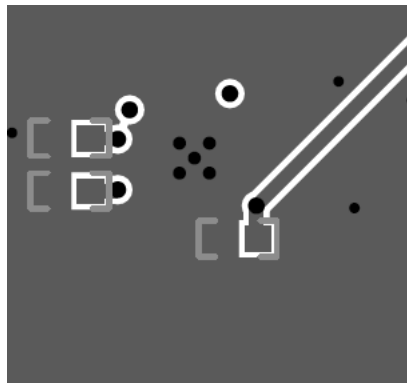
PCB Layout Example for LMK3H0102, Bottom Layer
